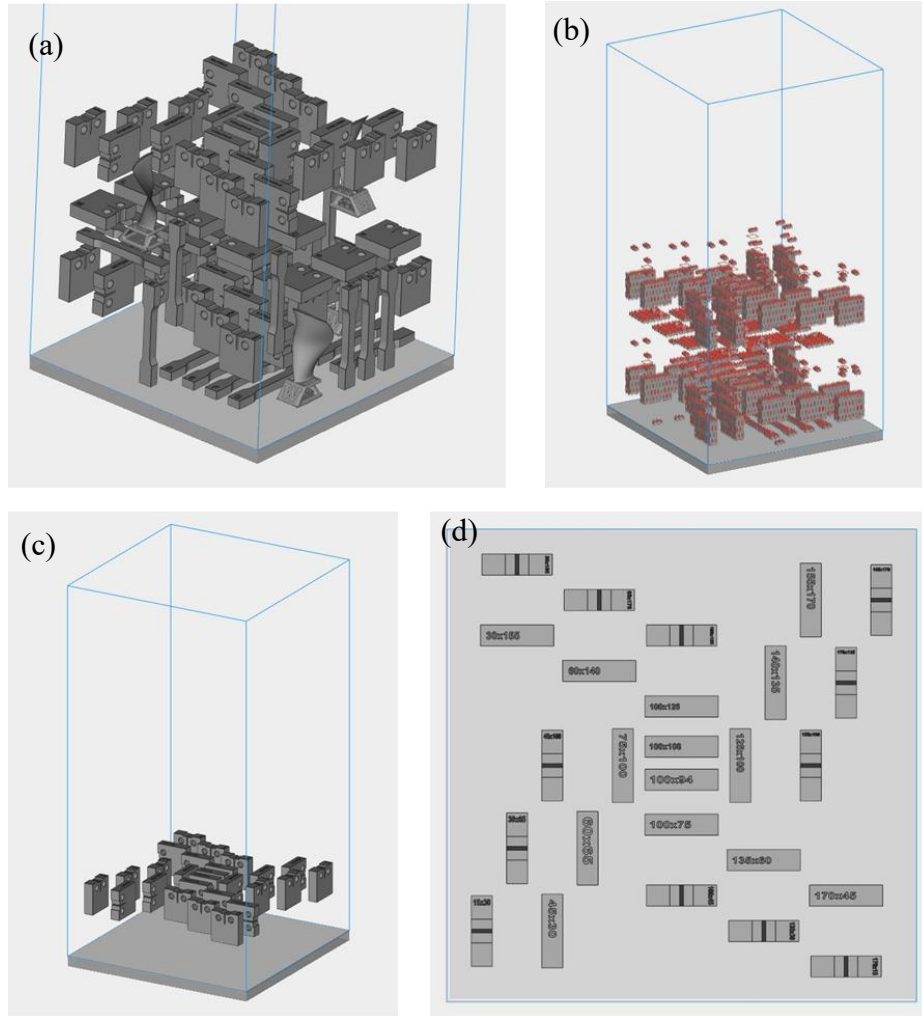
(a) Isometric view of the build chamber & (b) the specimen supports, (c) Isometric view & (d) Top view of the Compact Tension specimens
